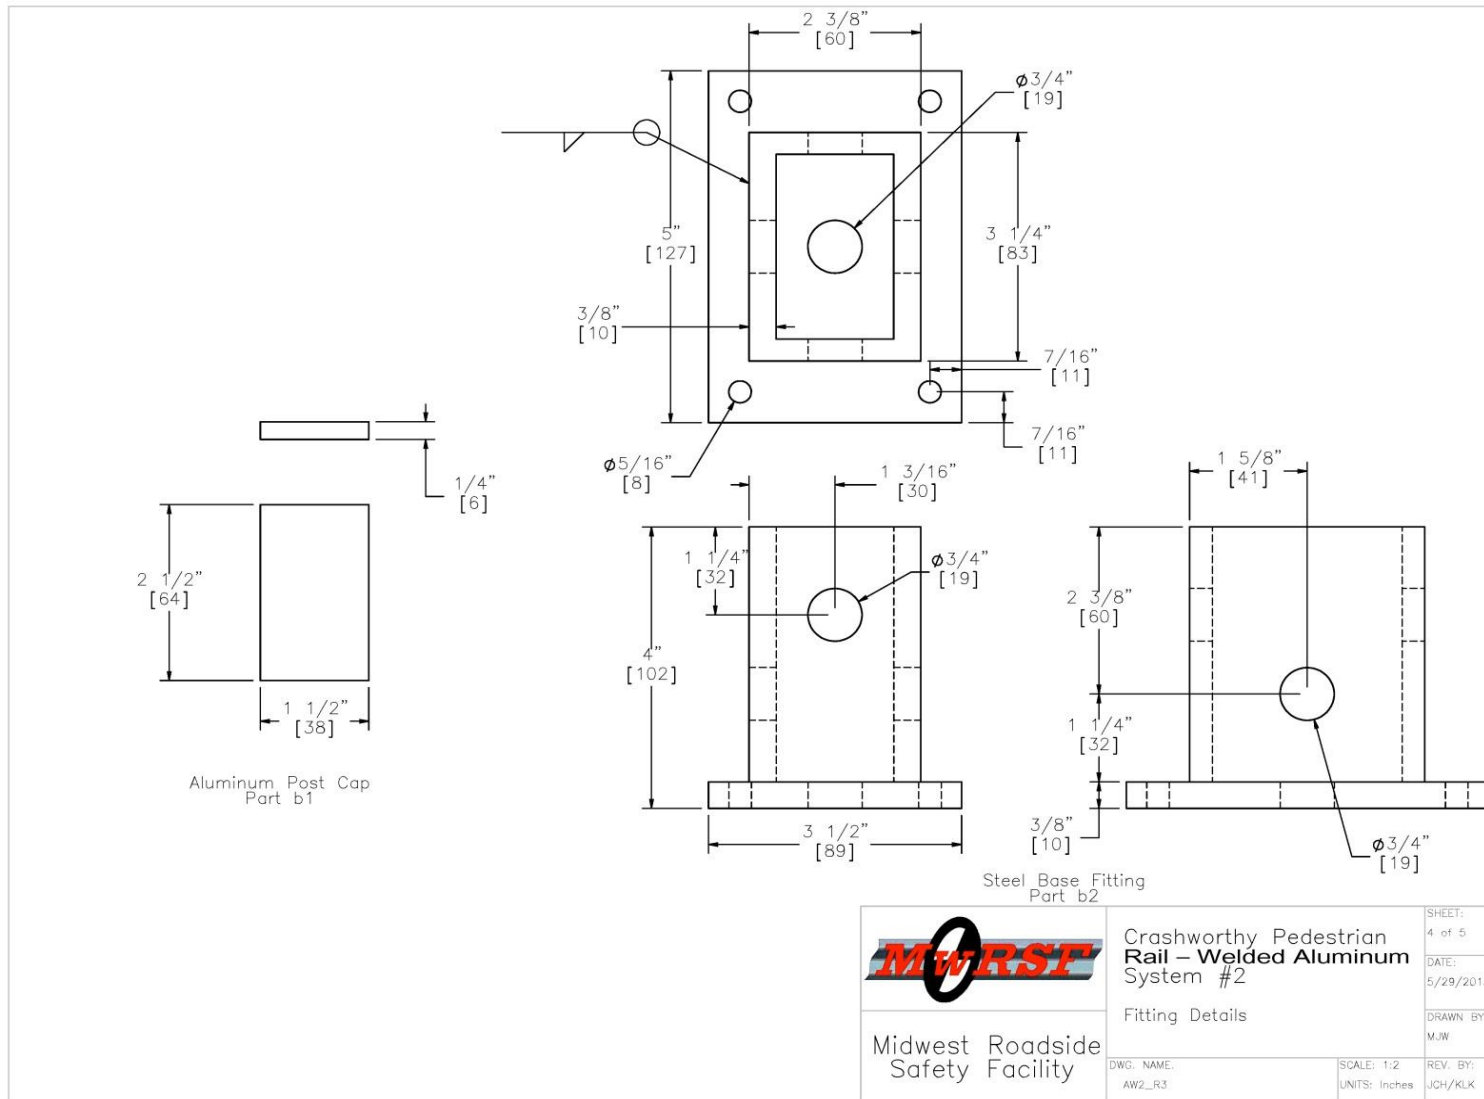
Welded Aluminum Rail, Design Concept AW2 (Sheet 4 of 5)
